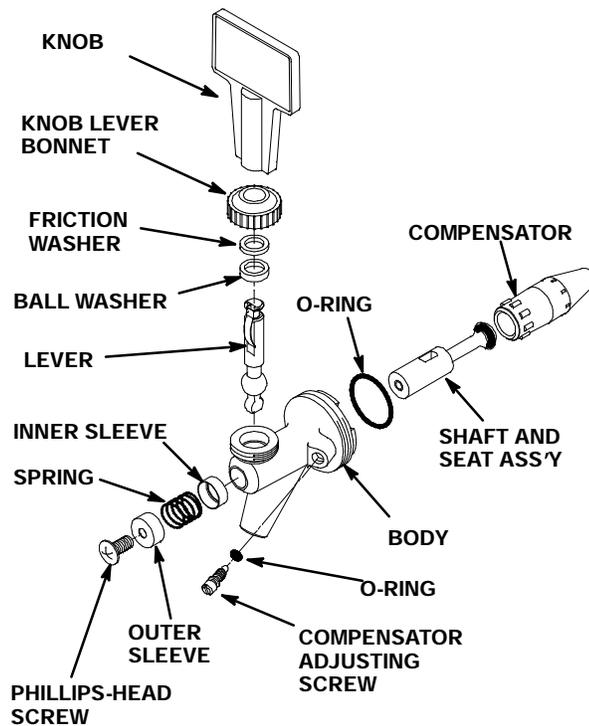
DISPENSING VALVE PARTS IDENTIFICATION
